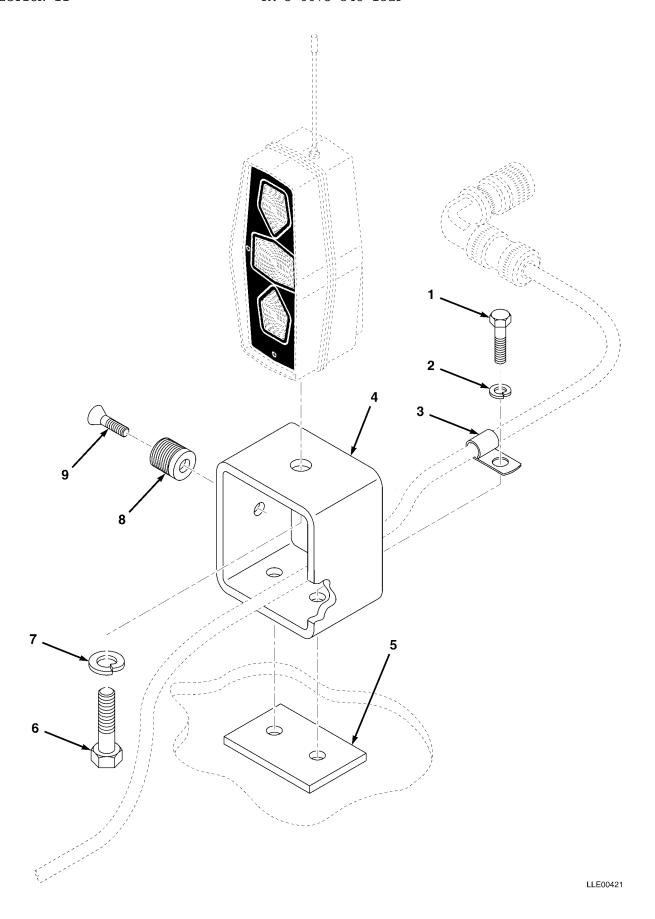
DOZER/SCRAPER GRADIO® DISPLAY MOUNT
